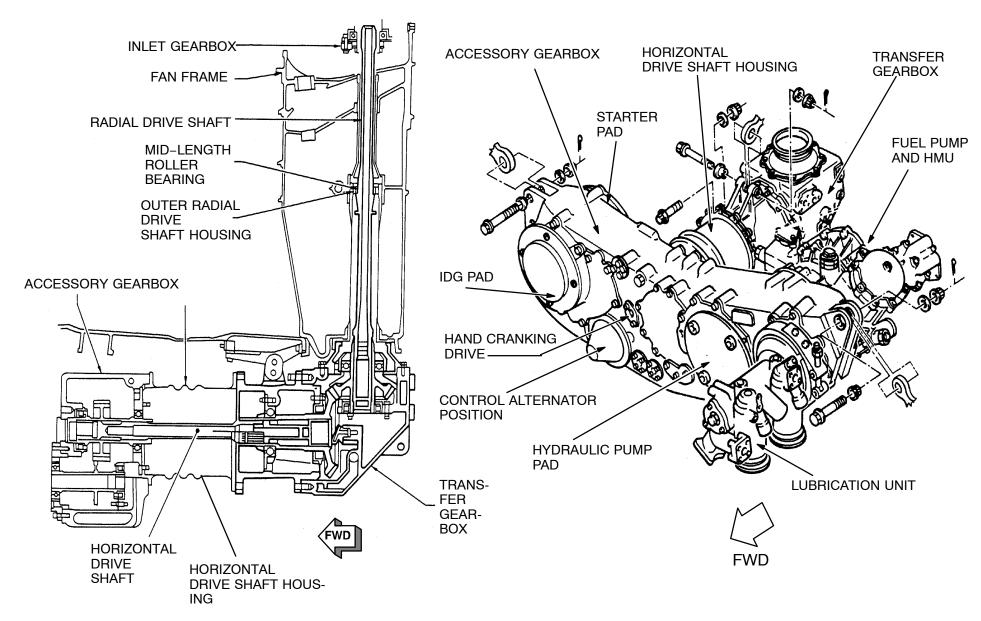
Accessory Gearbox 13|72-60|AGB|5A|L2/B1
